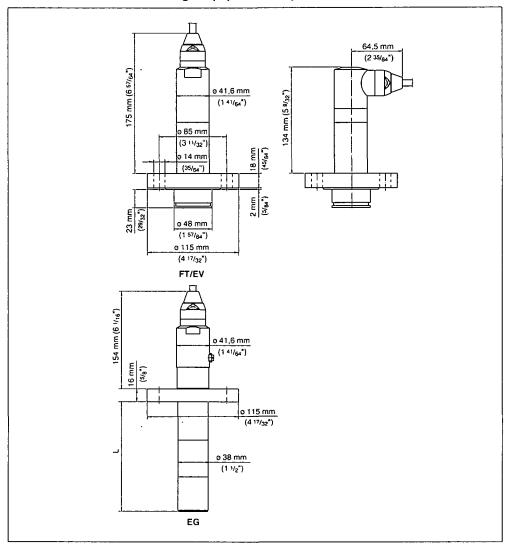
VEGABAR 74 - extension fitting for paper industry: EV/FT = absolutely flush for pulper (EV 2-times flattened), EG = extension for ball valve fitting (L = order-specific)
